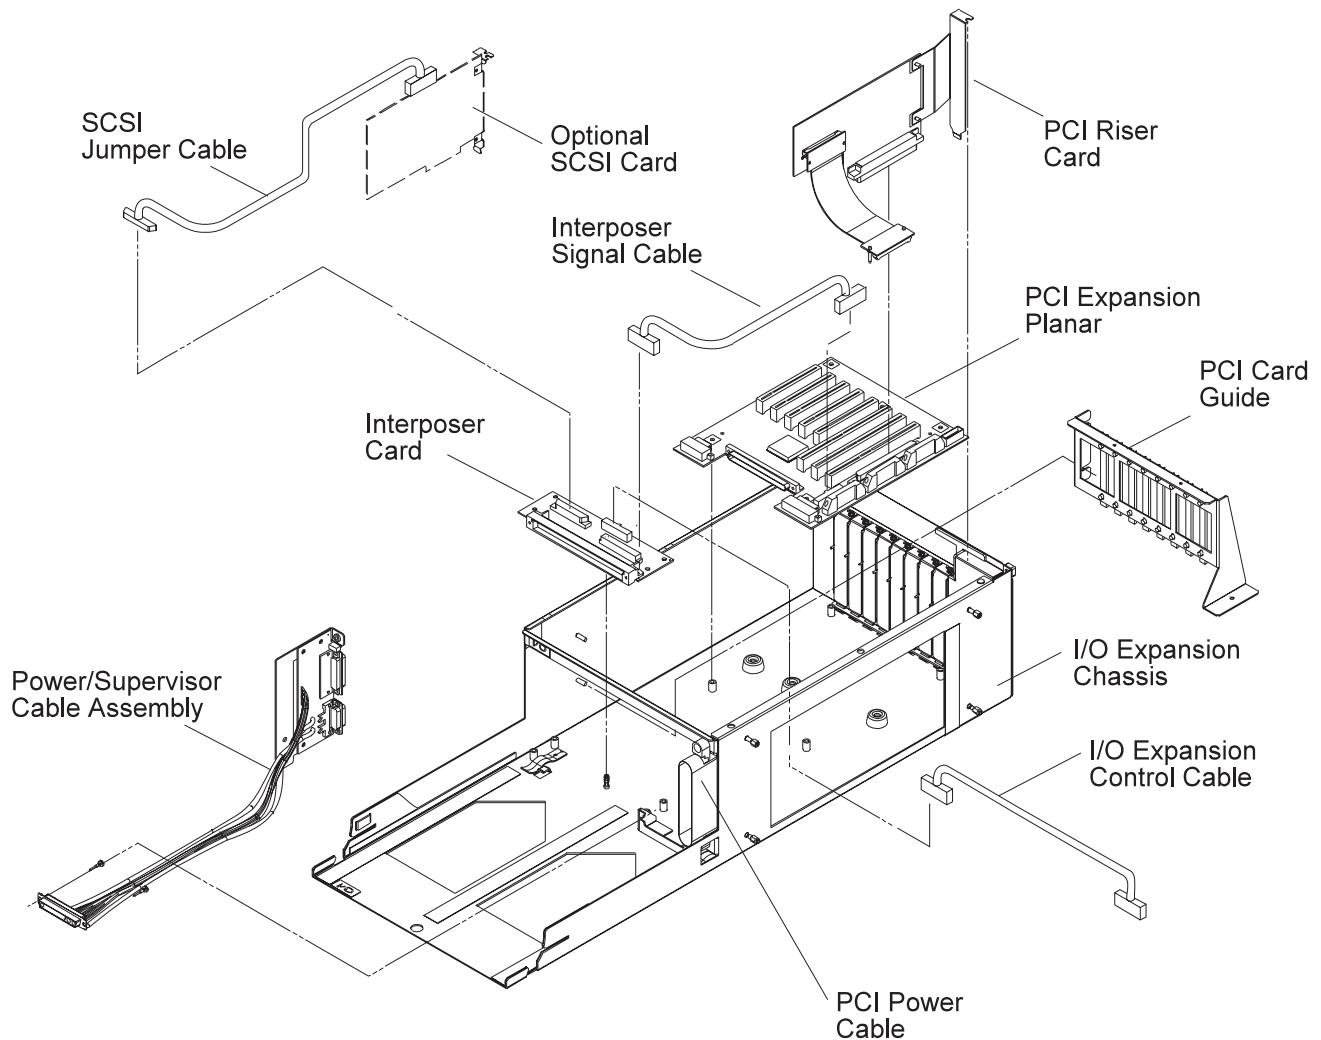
332 MHz SMP Node I/O expansion assembly components
